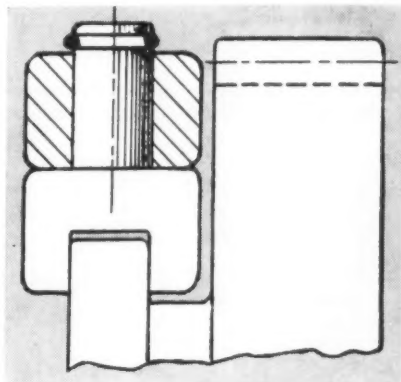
In this sketch, a small and narrow straddle shifting shoe engages a ground flange which is located at the side of the gear.
